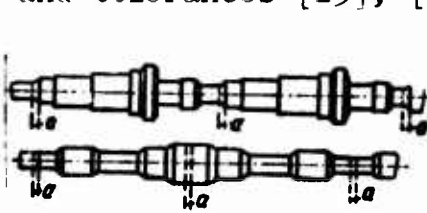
Examples of forgings, obtained by transverse rolling (a - cutting places).
